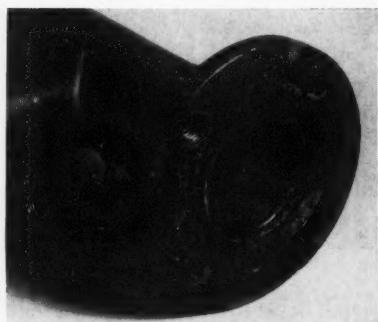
Whirl sintered coating on a fabricated steel flanged tee.
